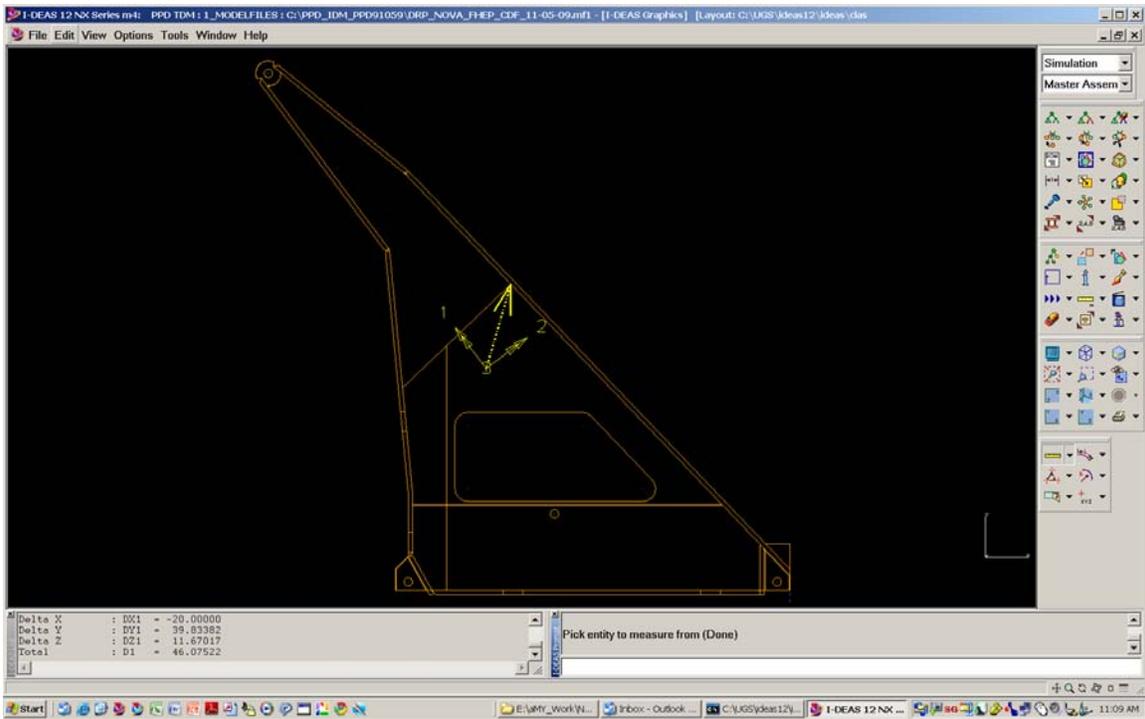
Side view of the Upper frame for the NOvA blocks Pivoter.
